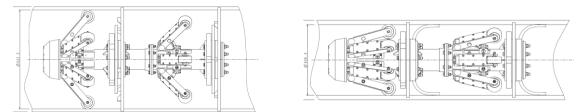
ART Tow section in 24" (left) and 16" (right) sections
